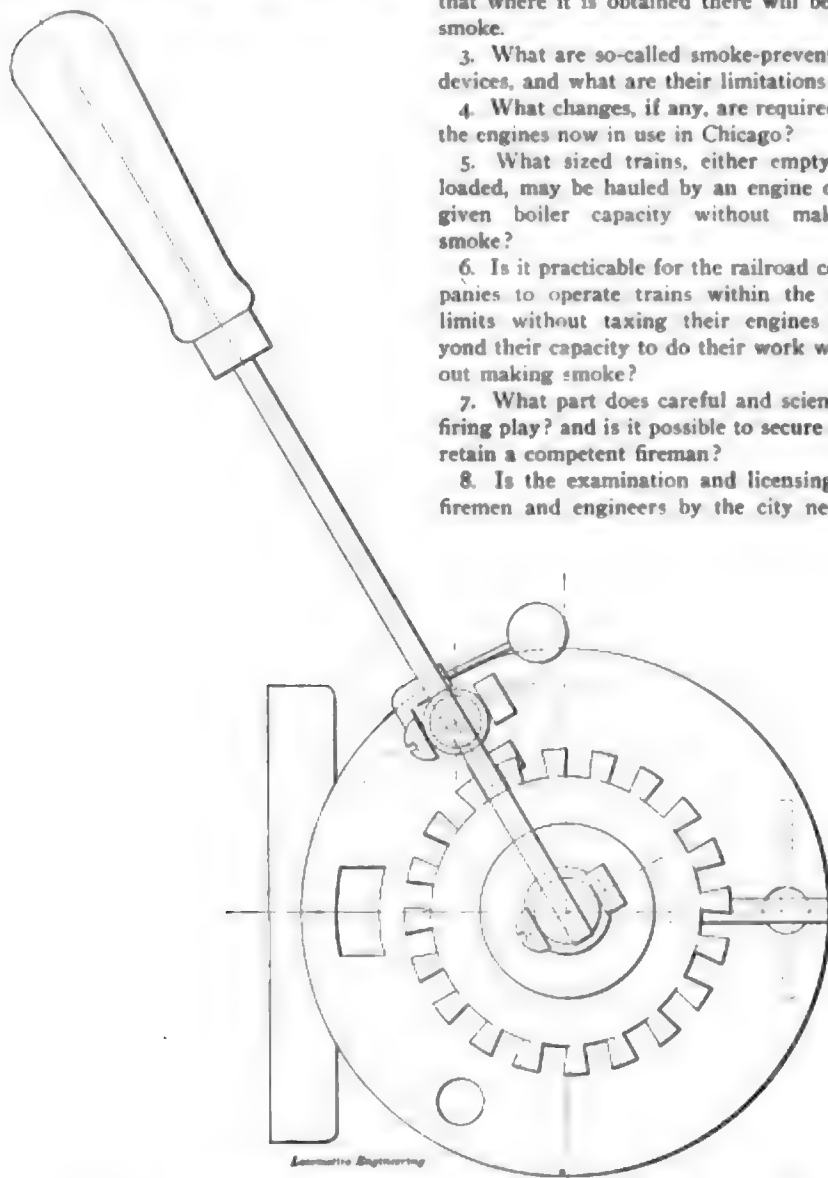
HAND MACHINE FOR GRINDING PISTON RINGS IN TRIPLE VALVES.
